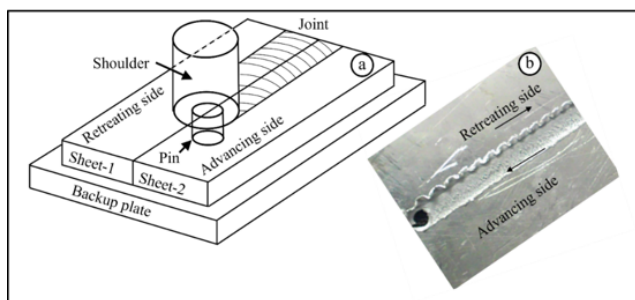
Friction stir welding; (a) Schematic diagram and (b) FSW welded sample
